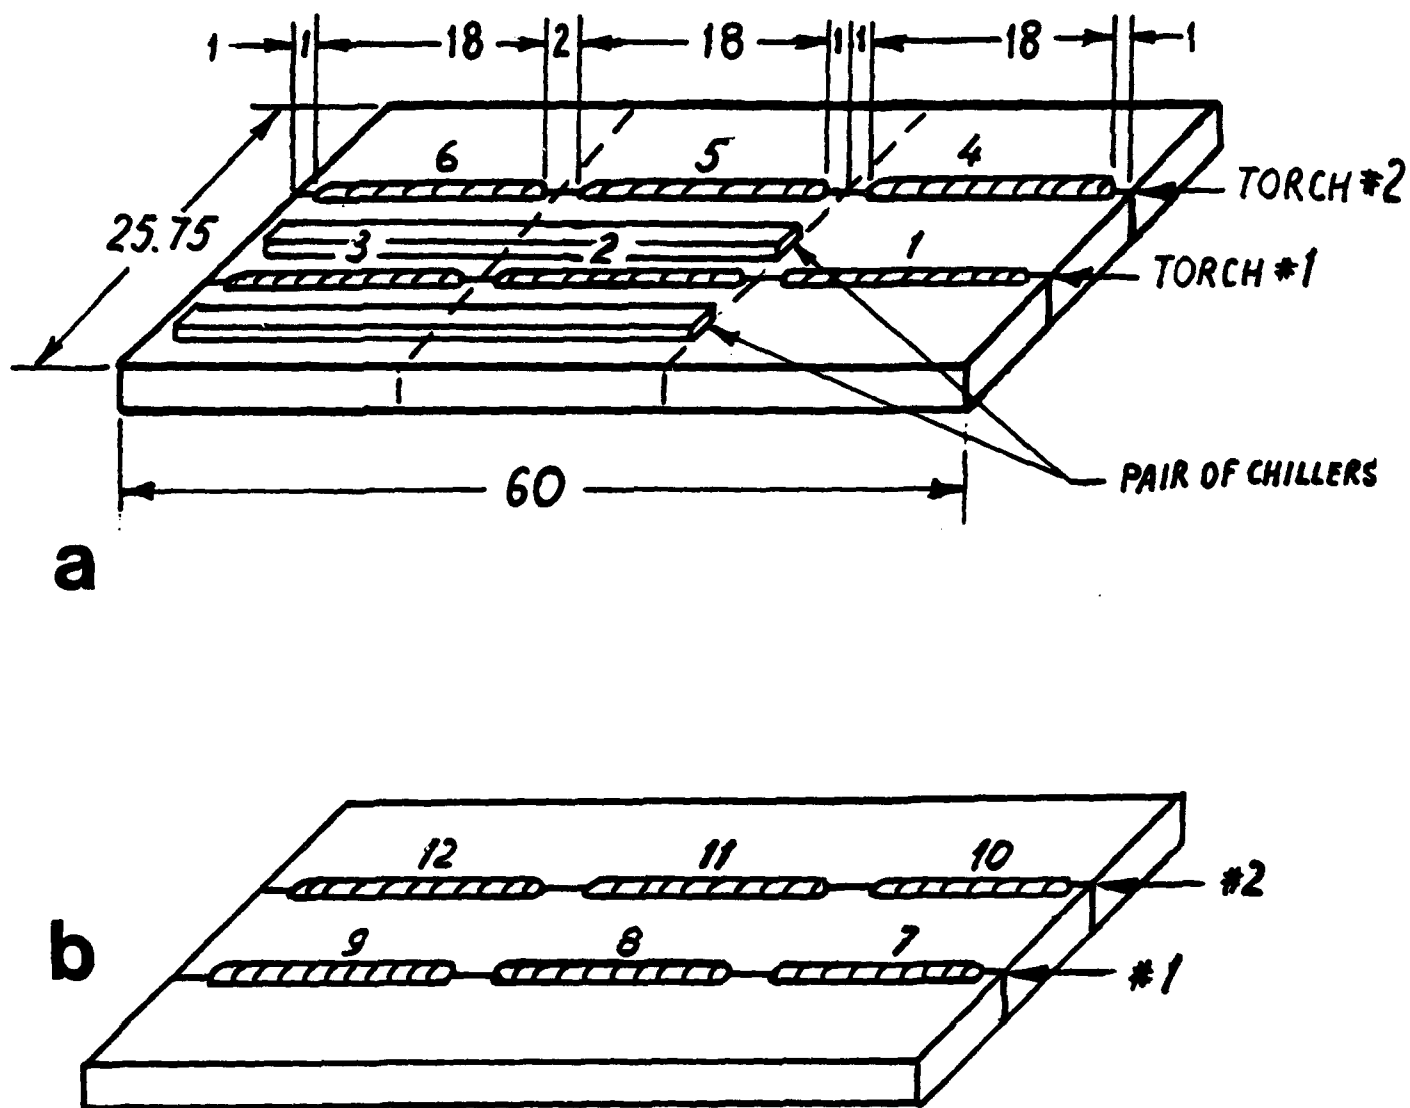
Layout of test pieces on a welded panel assembly.
